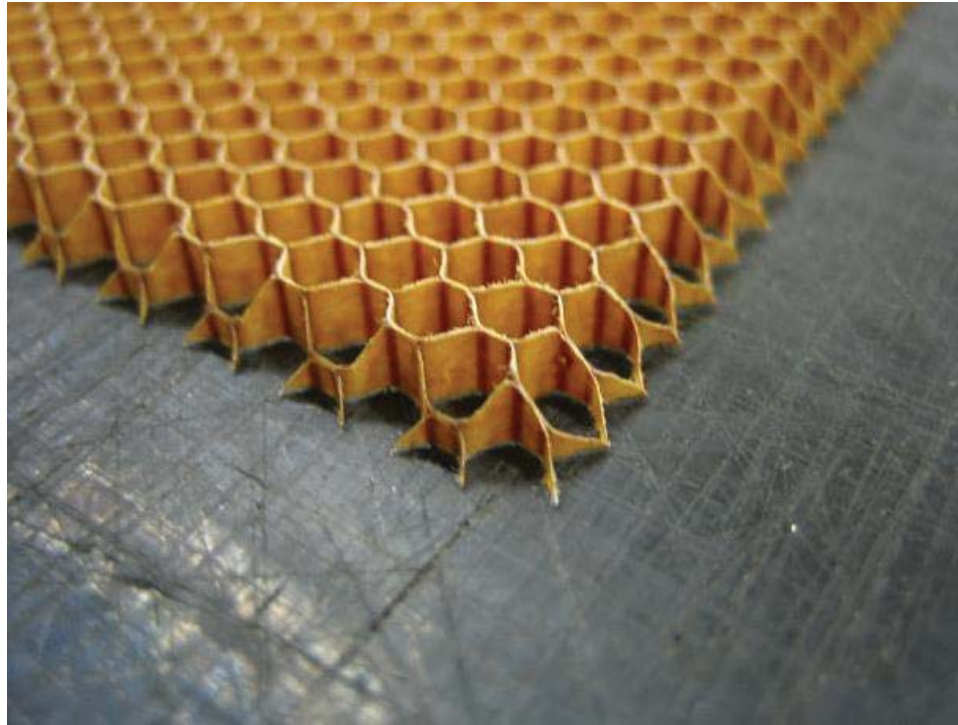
Close-up view of Nomex honeycomb sandwich core with chamfered edges.
